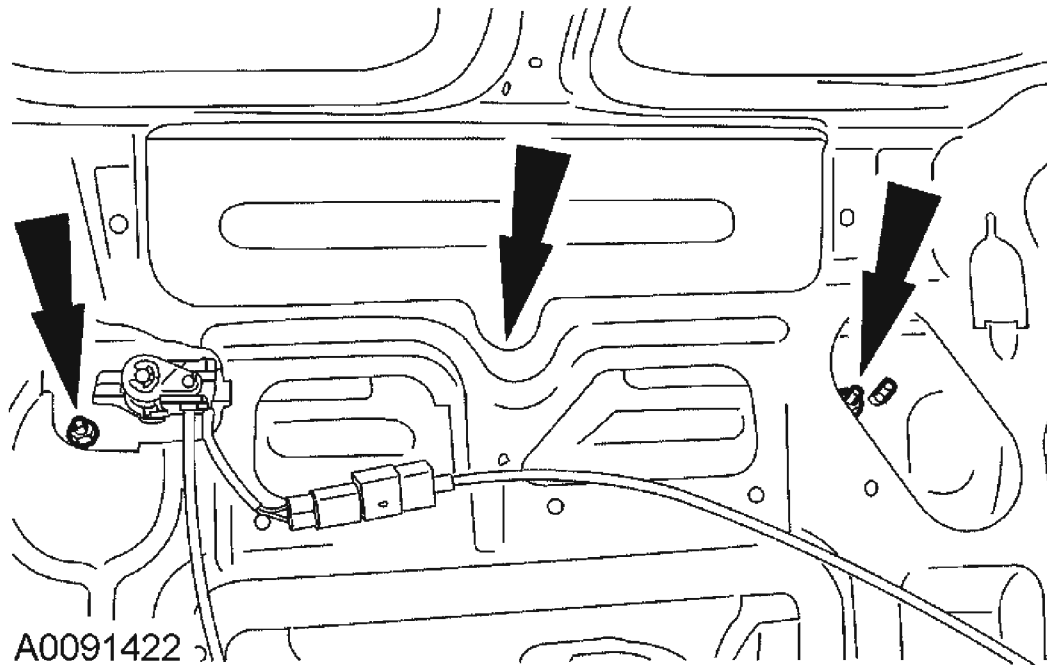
Removing Nuts Of Luggage Compartment Lid Handle
